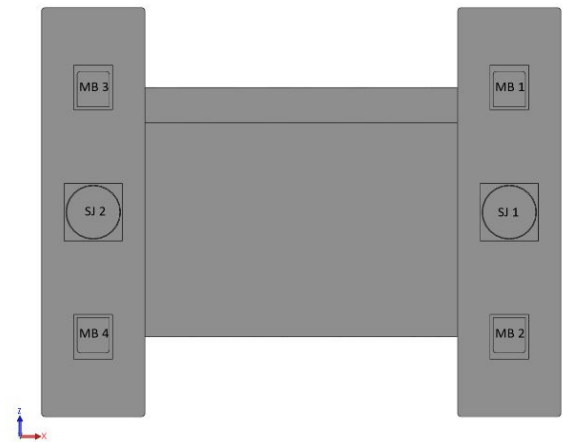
Bottom view of shield casing showing where the linear actuators (four corners) and power screws meet the mounting brackets. Referenced in Table 1.
